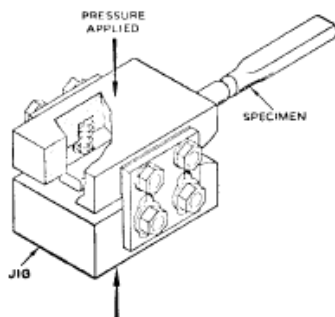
Squeezing Jig for Flattening Ends of Full-Size Tension Test Specimens
